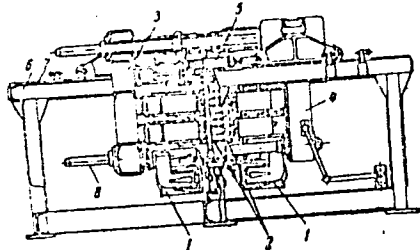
1 - welding transformers; 2 - welding guns; 3 and 4 - vertical plates; 5 - driving mechanism for plates; 6 - frame; 7 - guides; 8 - rods
